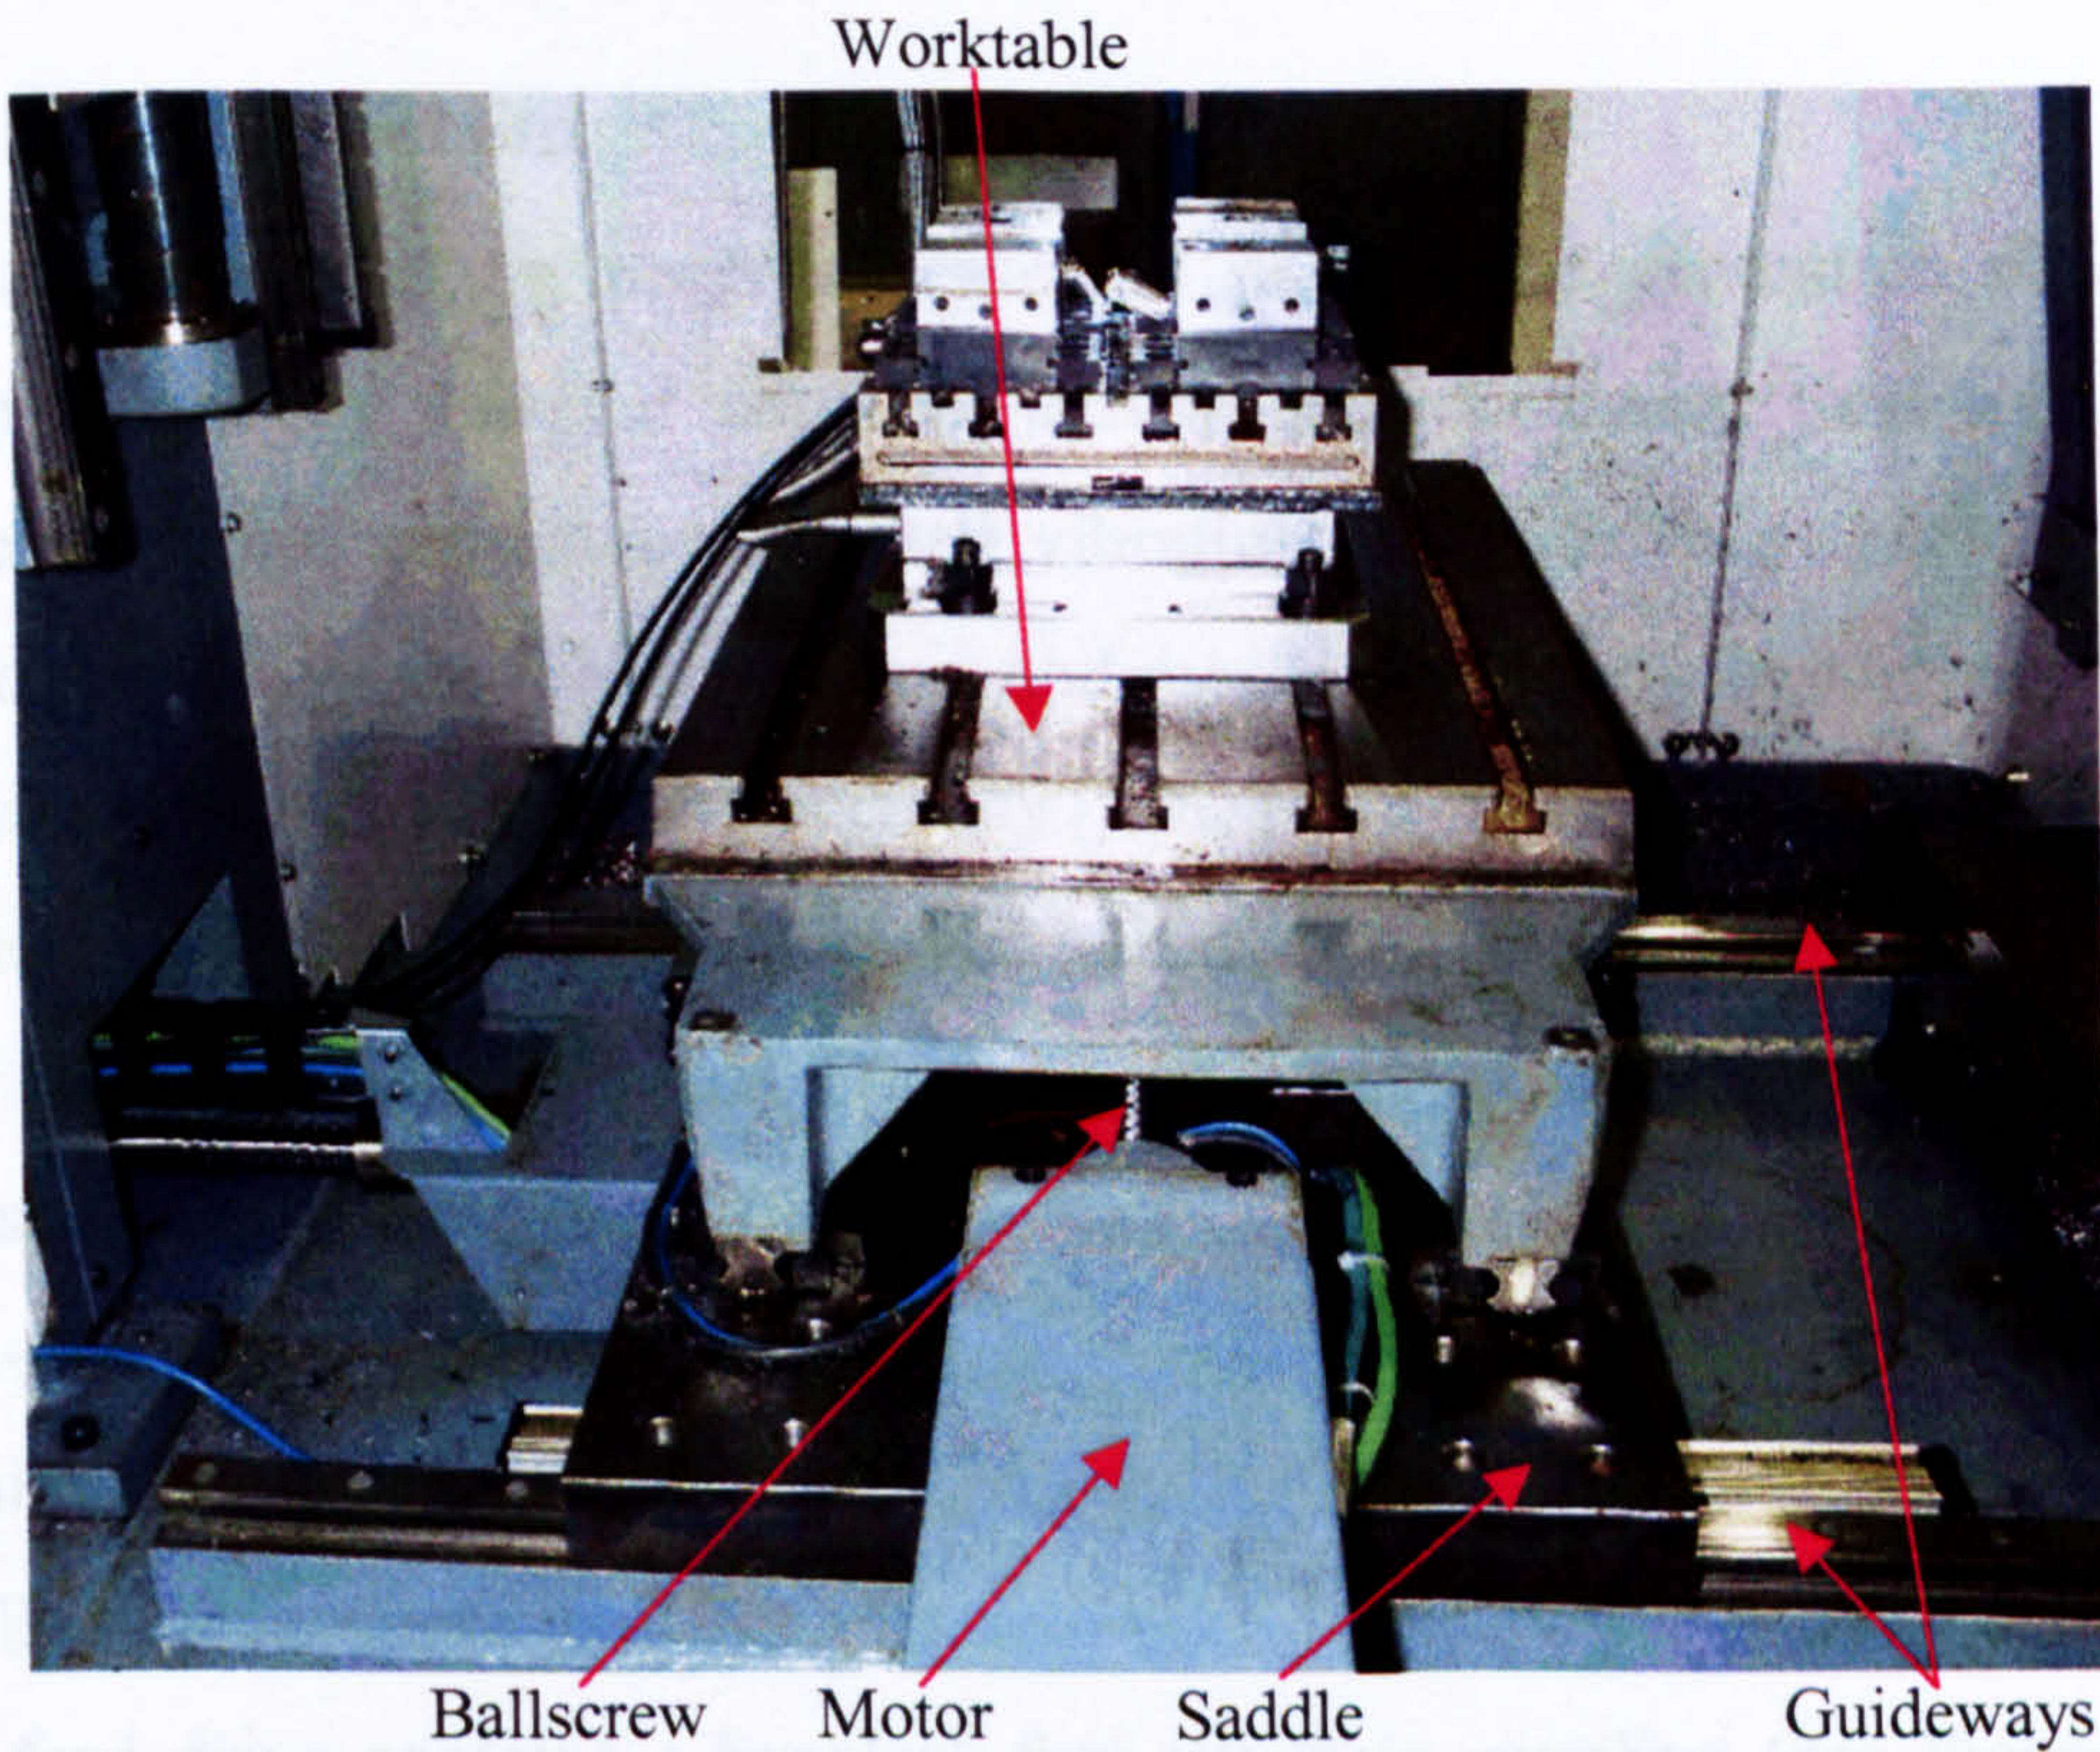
Mechanical load of the X-axis drive for Arrow 500 CNC machine tool
